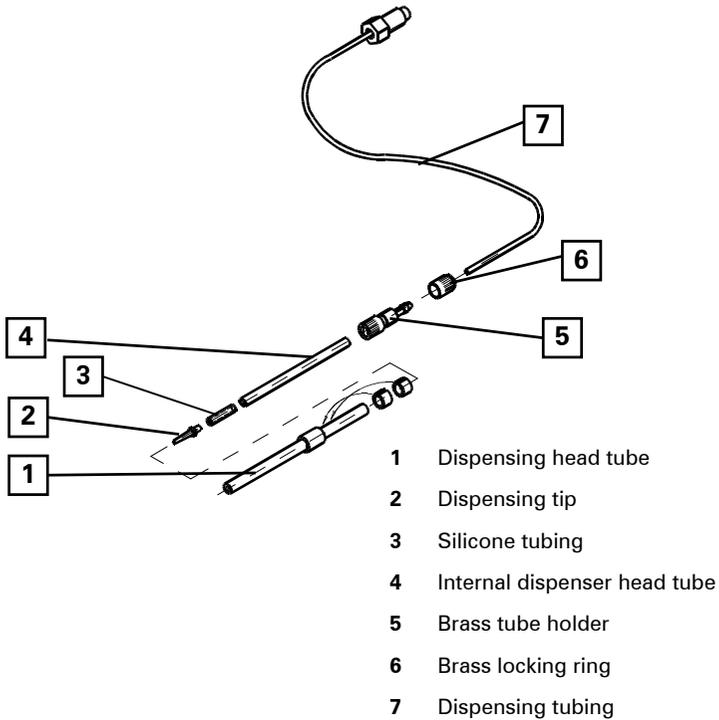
Structure of the complete dispensing tube assembly
